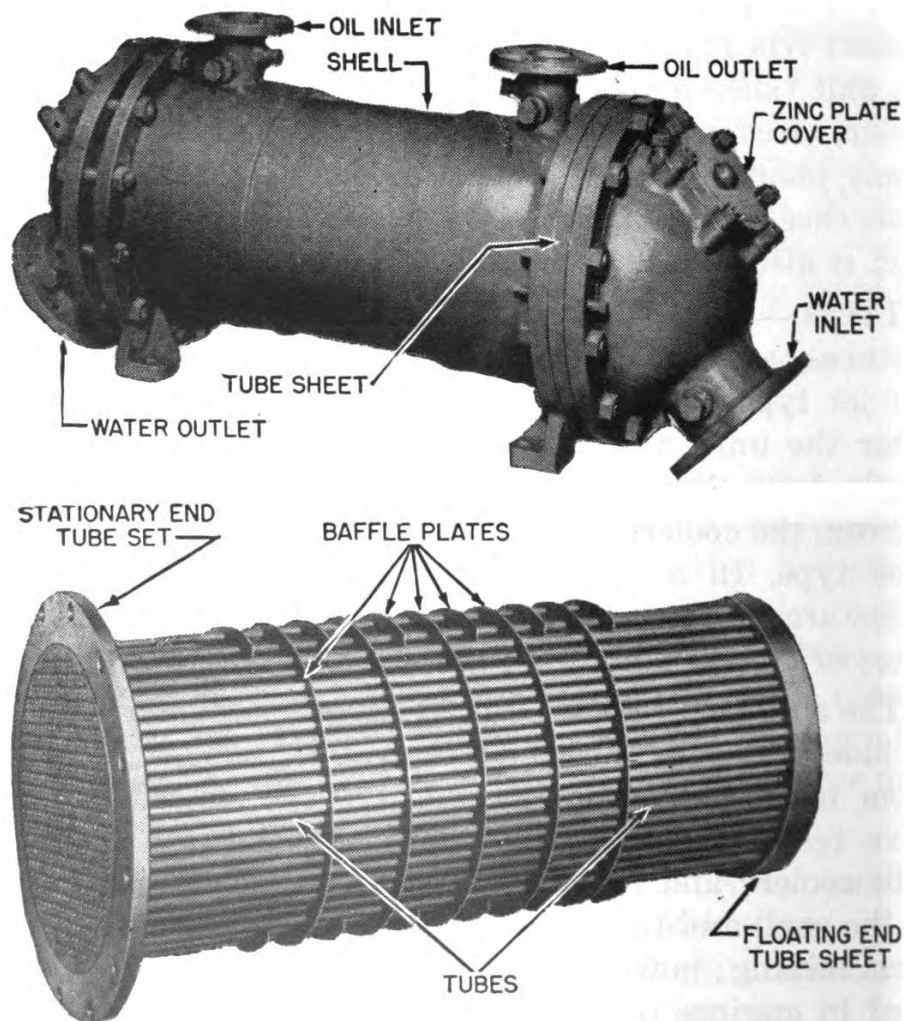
Shell-and-tube cooler of a Cooper-Bessemer GSB-8 engine.
